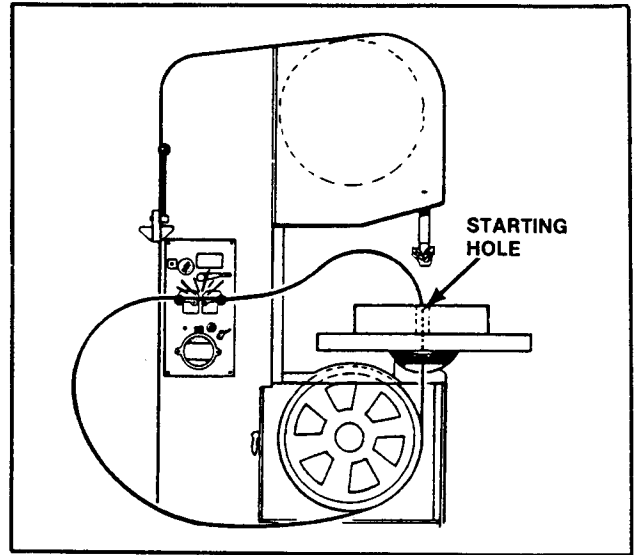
INSULATE SAW BAND BEFORE WELDING.
